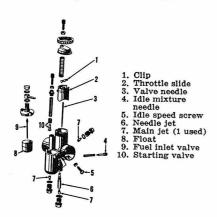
Exploded view of typical Bing carburetor used on some models. Main jet (7) is shown at three different possible locations.
